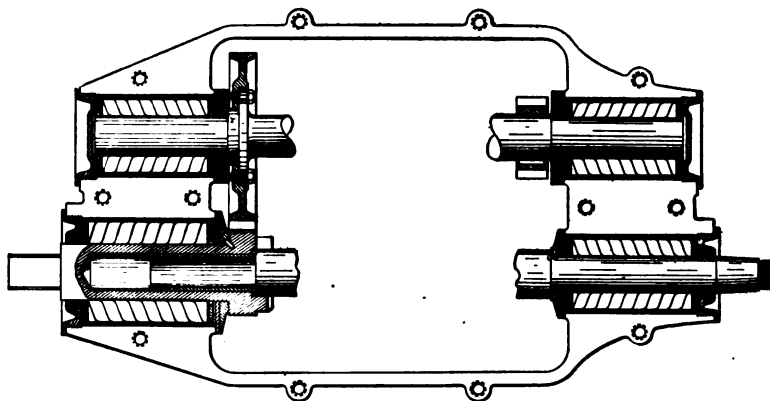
Hyatt Roller Bearing as Used in Transmission Case.
